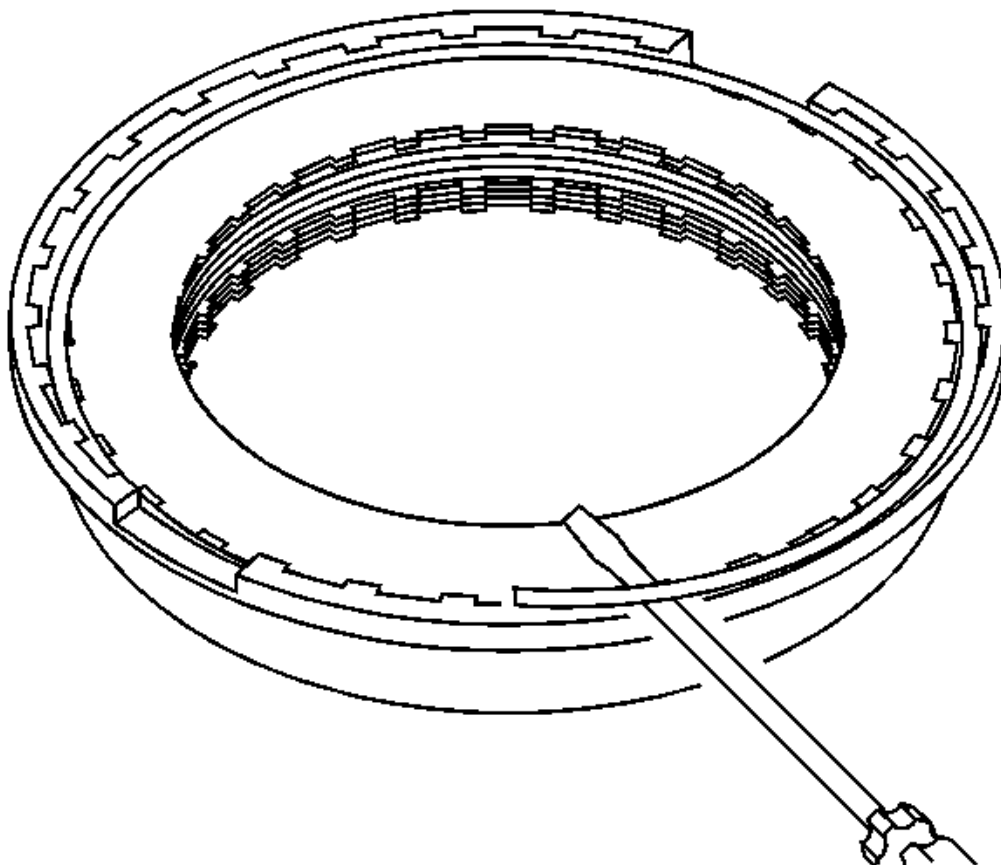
Identifying 3-5 Reverse Clutch Plates
